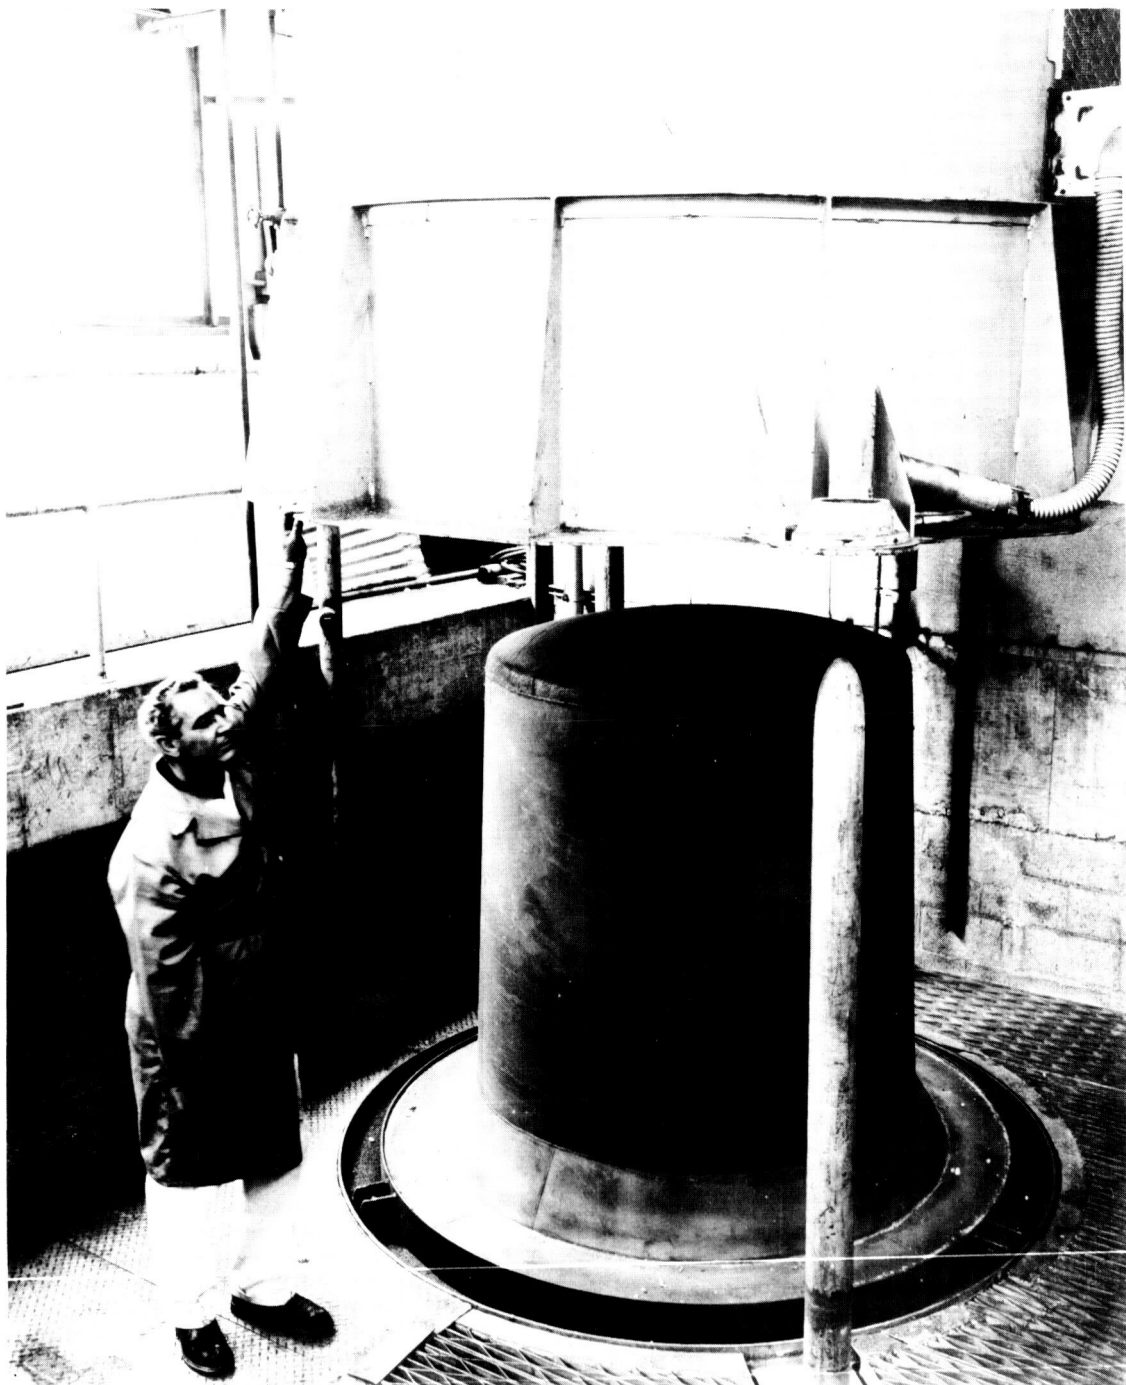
INCONEL BELL-FURNACE RETORT FABRICATED IN SECTIONS BY SHEET-ROLL BENDING AND THEN WELDED TOGETHER
